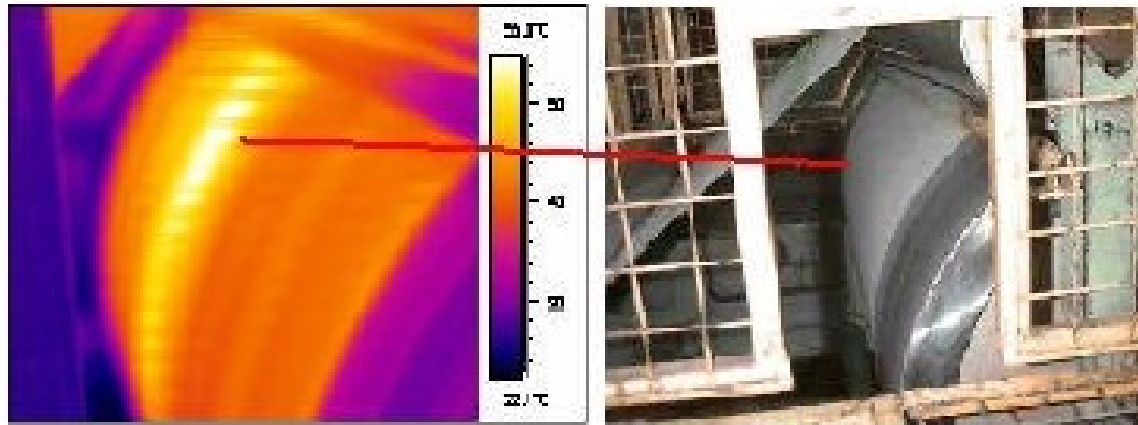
Indicated hot area on the cooling drum of the 150 machine.
